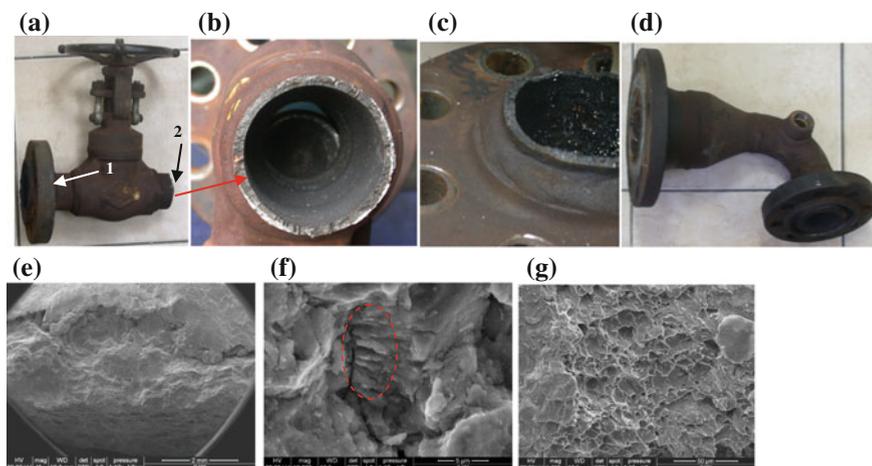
a Failed part of the flange with pipe: 1 flange. 2 fracture of the pipe. b Enlargement of the fracture surface 2 on the picture a. c Enlargement of the fracture surface on the other side (near the welding flange). d The adjacent part to the flange (1). e–g SEM photo of the fracture of different magnifications. The dashed red circle—fatigue striations. g Dimples characterizing ductile fracture
